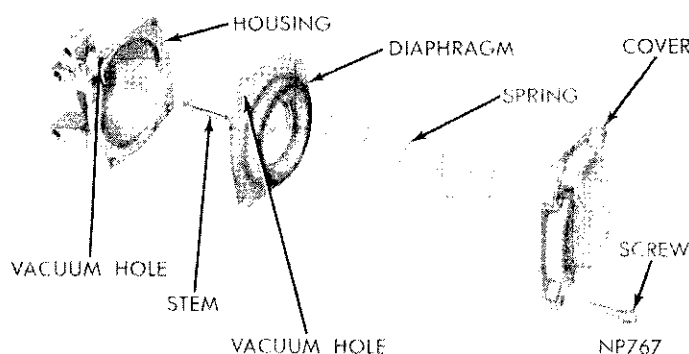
Secondary Throttle Diaphragm (Exploded View)
